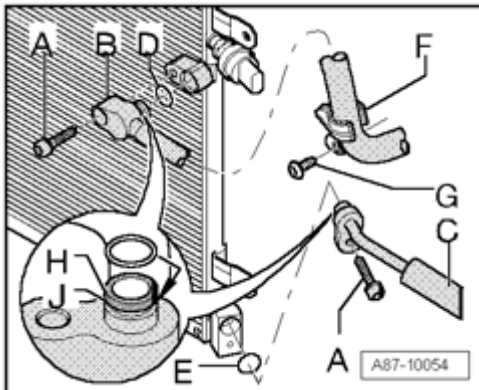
Screwing Out Bolts And Disconnecting Refrigerant Pipes From Condenser
